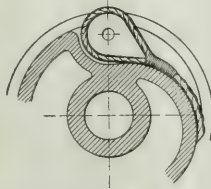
BARREL, WINDING ONE PART OF ROPE.
